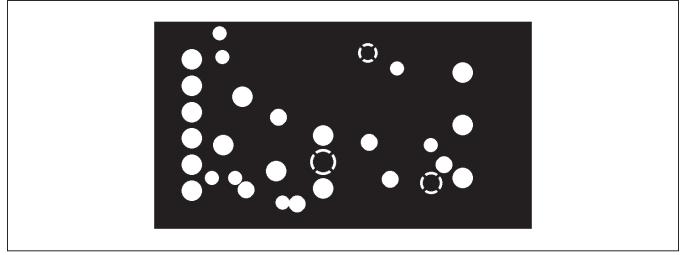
MAX11205PMB1 Peripheral Module PCB Layout—Inner Layer 2 (Power)
